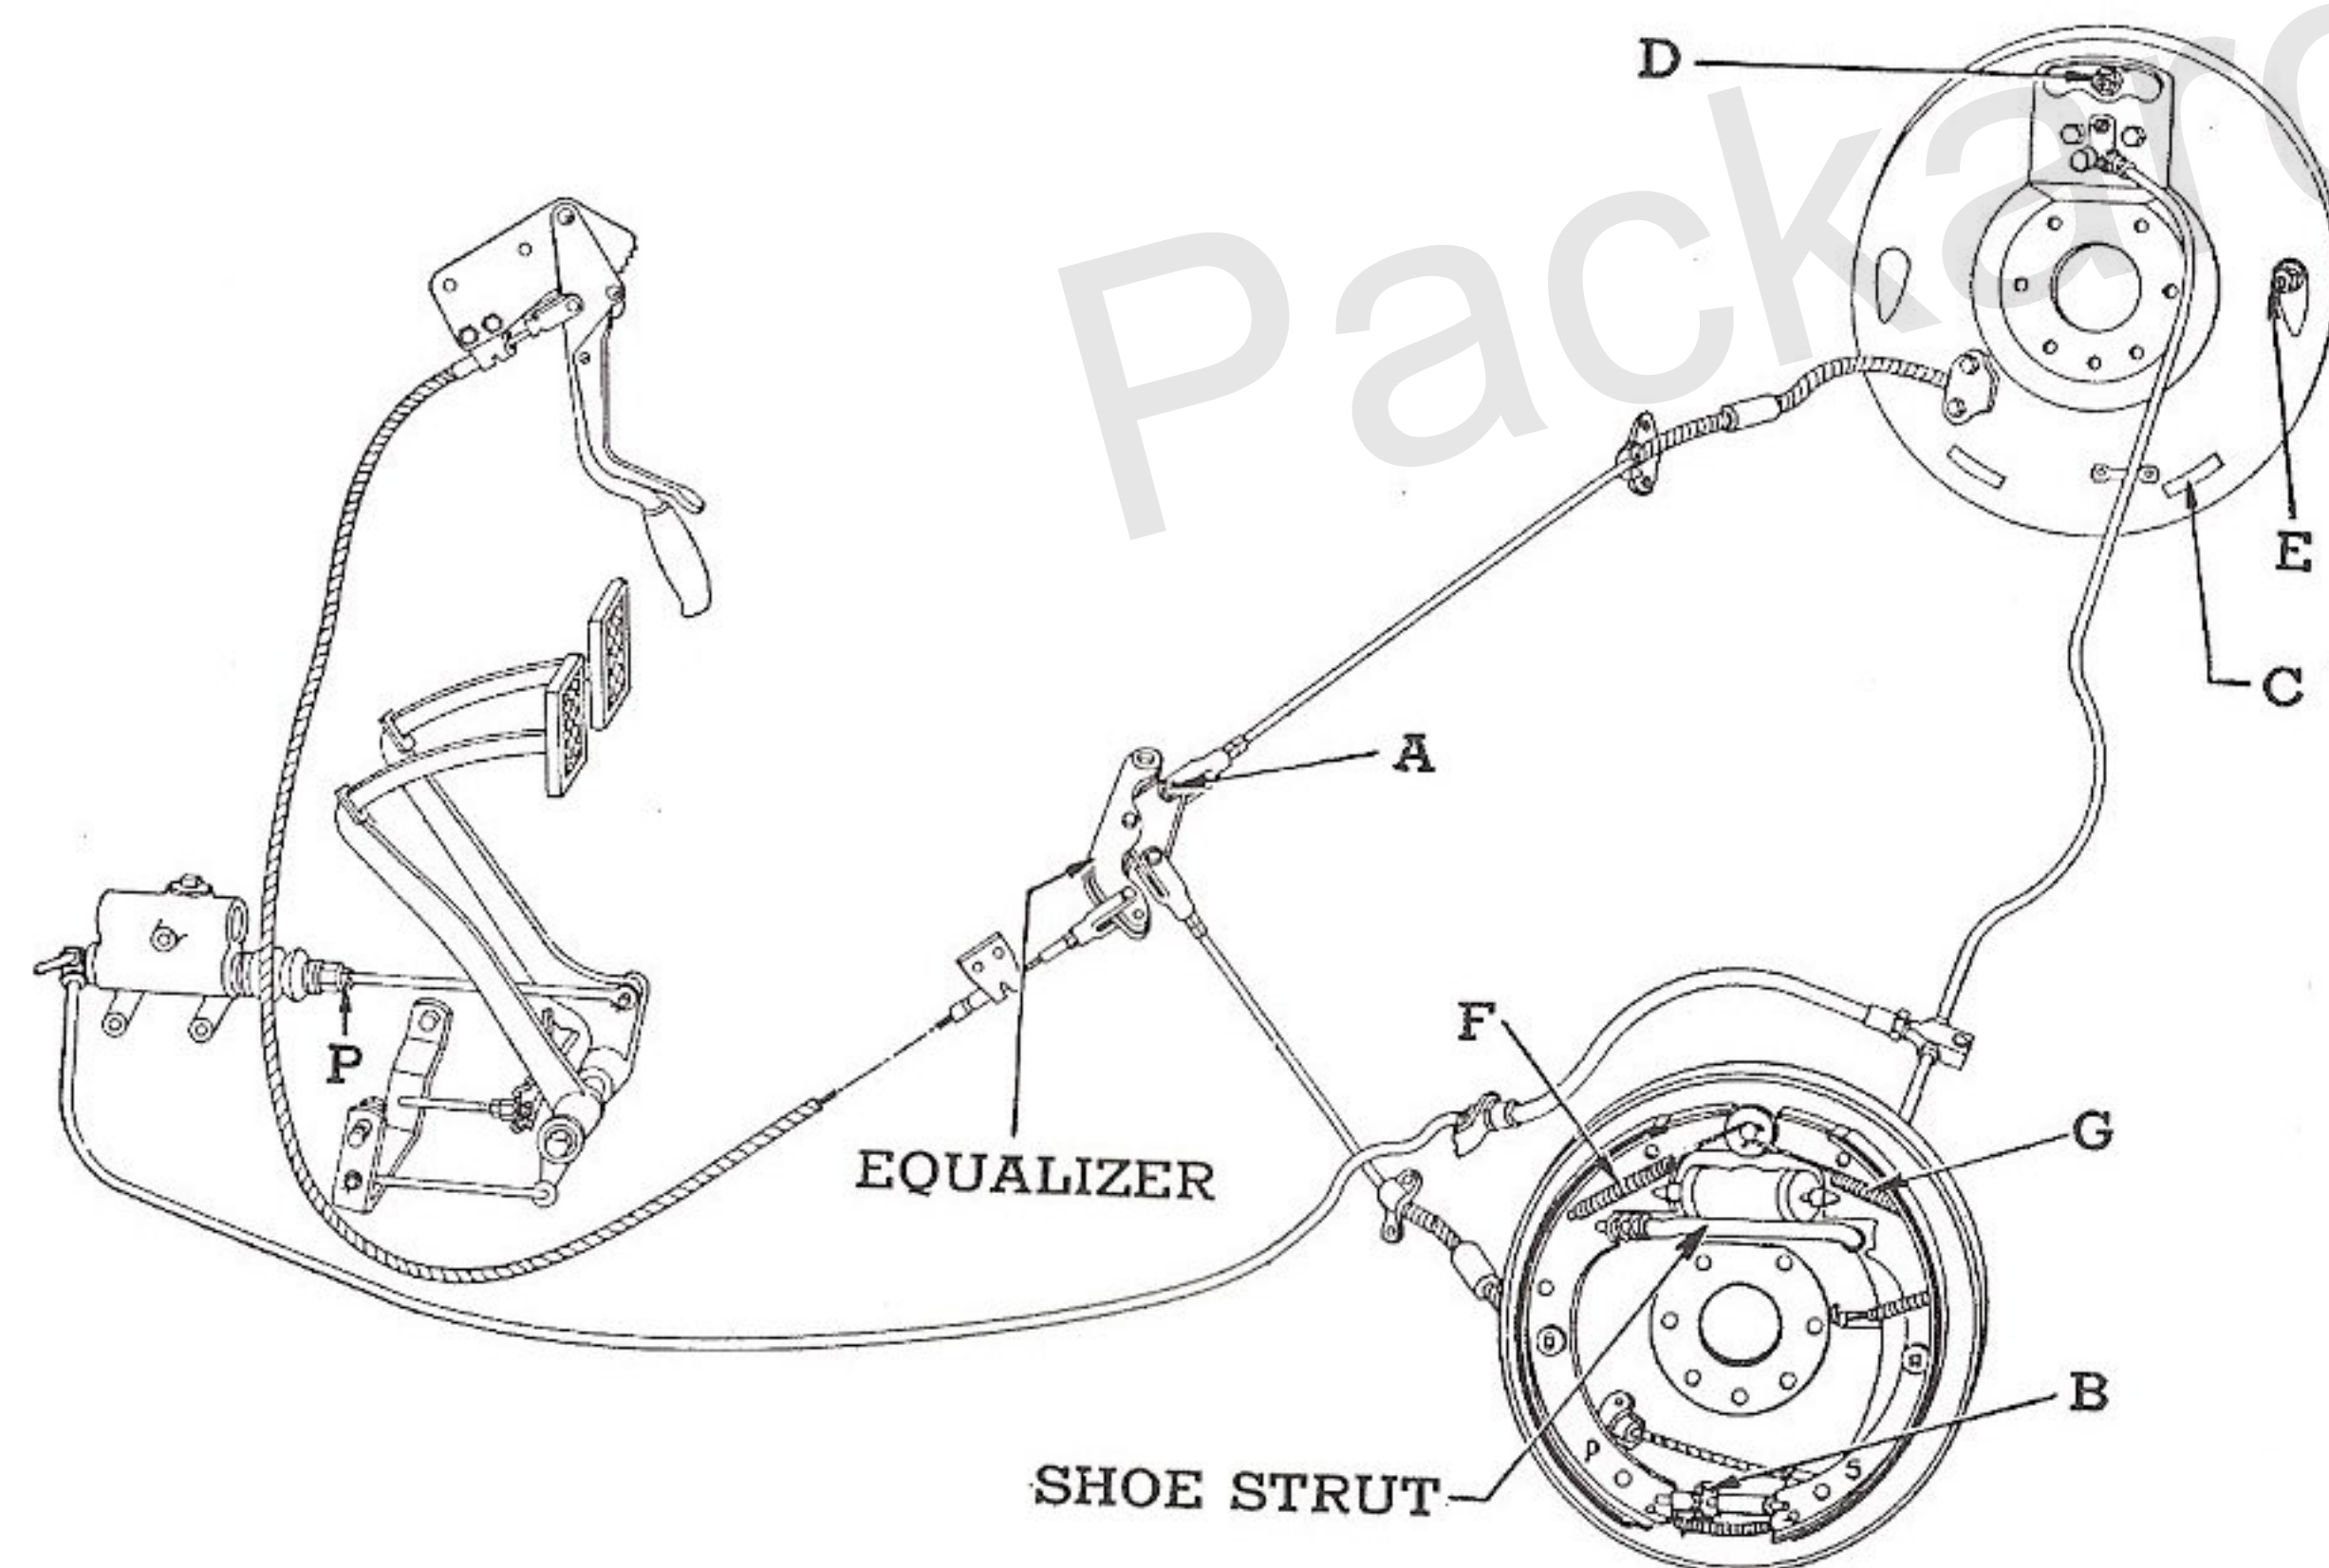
Chassis Brake Diagram. Clearance Adjuster is Shown at "B," which is Accessible Through "C." Anchor Pin is Shown at "D" and Eccentric at "E"
